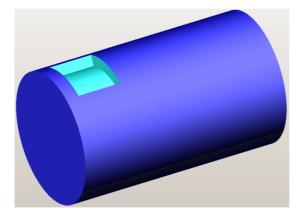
The test part for 5-axis machining (pocket on a cylinder).
